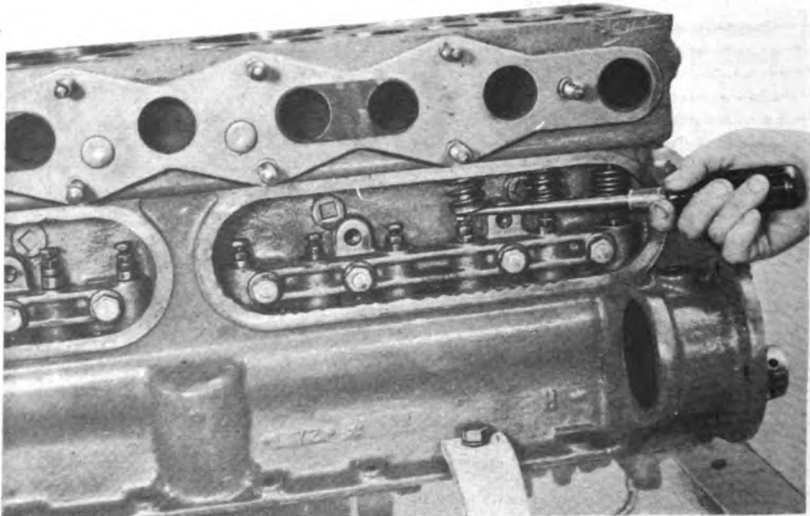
Relation of Camshaft to Valve Tappets, Springs, Guides, and Valves
